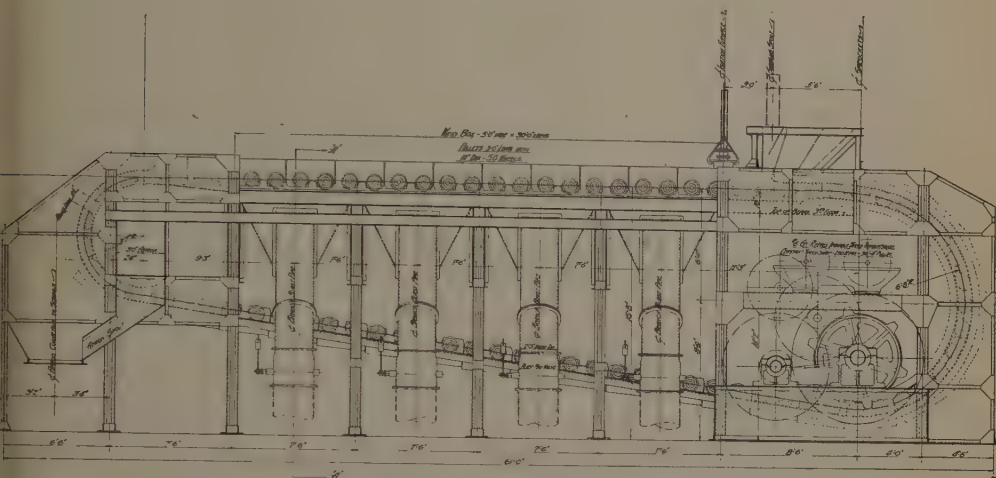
Large Dwight and Lloyd continuous sintering machine.
